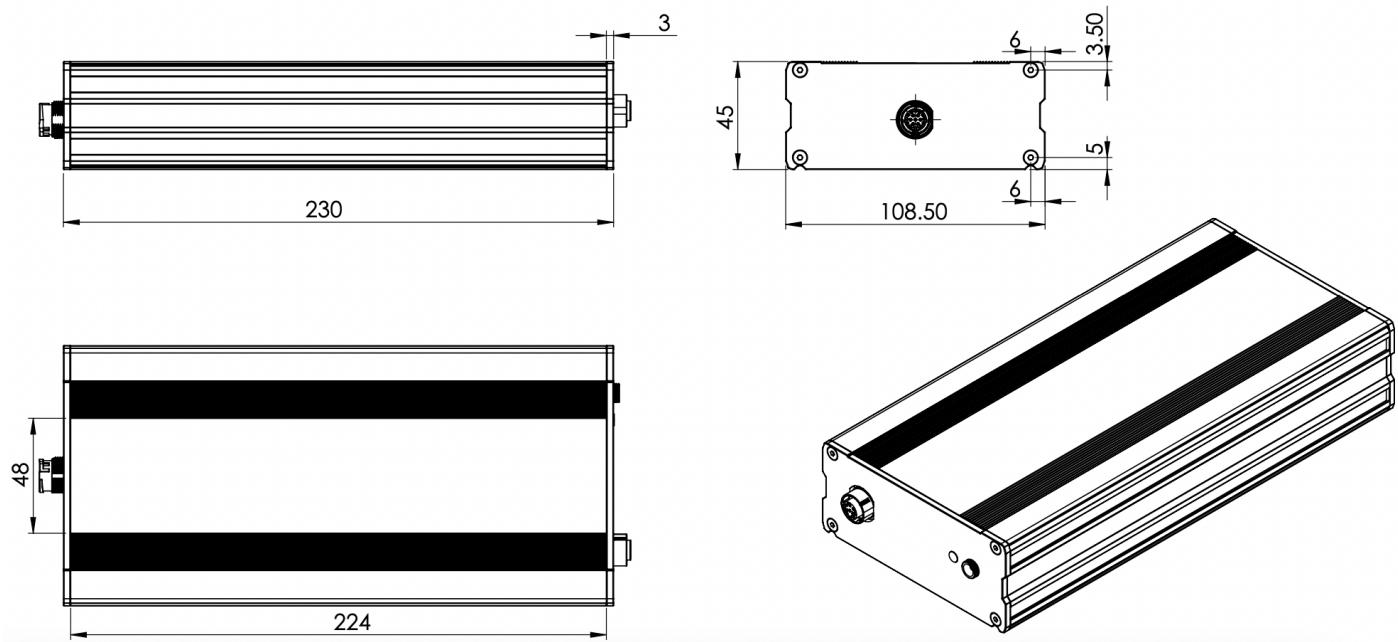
Dimensions of transducer box (all dimensions are in millimeters)
